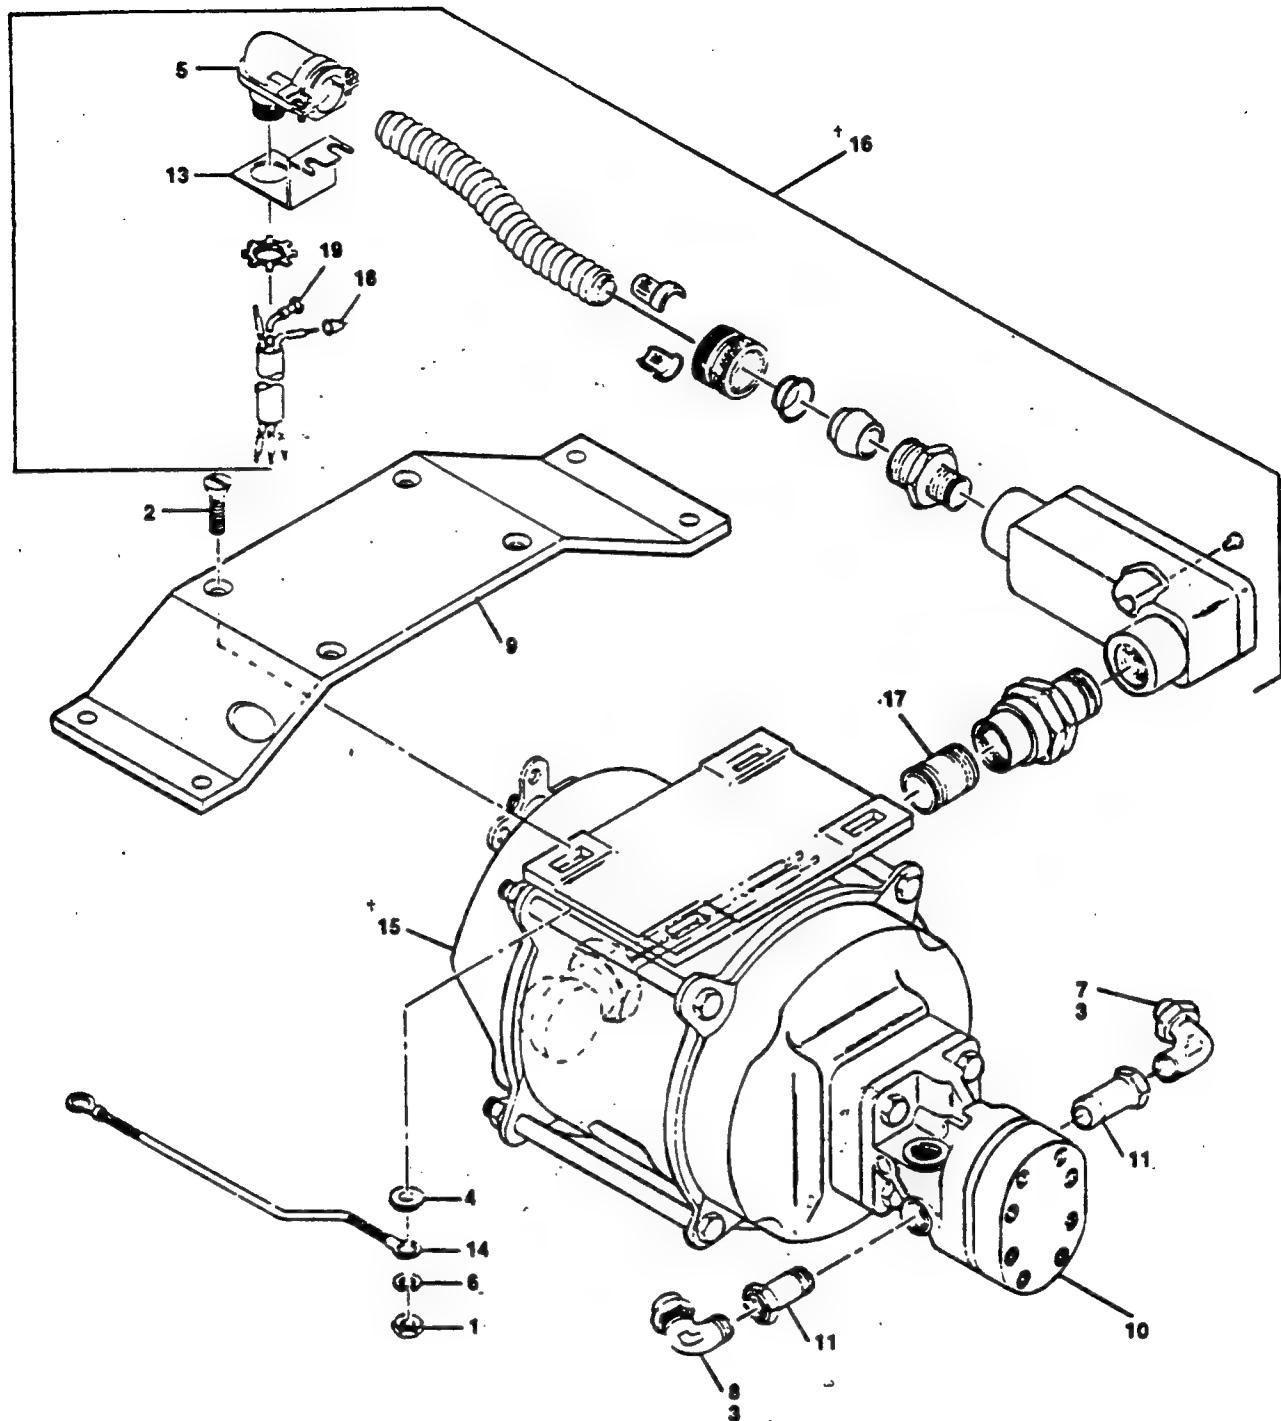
2080L MOTOR AND PUMP ASSEMBLY
